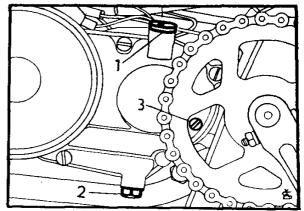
Filling and discharging oil screw 1. Filling hole screw, 2. Discharge oil screw 3. Control hole
